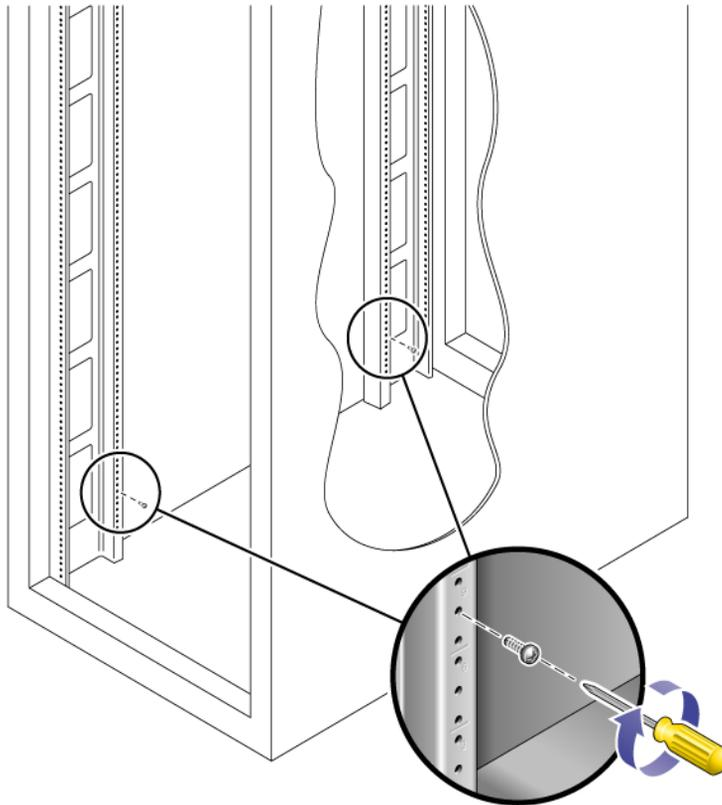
Inserting Rail Mounting Screws in Middle Holes of the Upper Mounting Unit of the Mounting Slot
